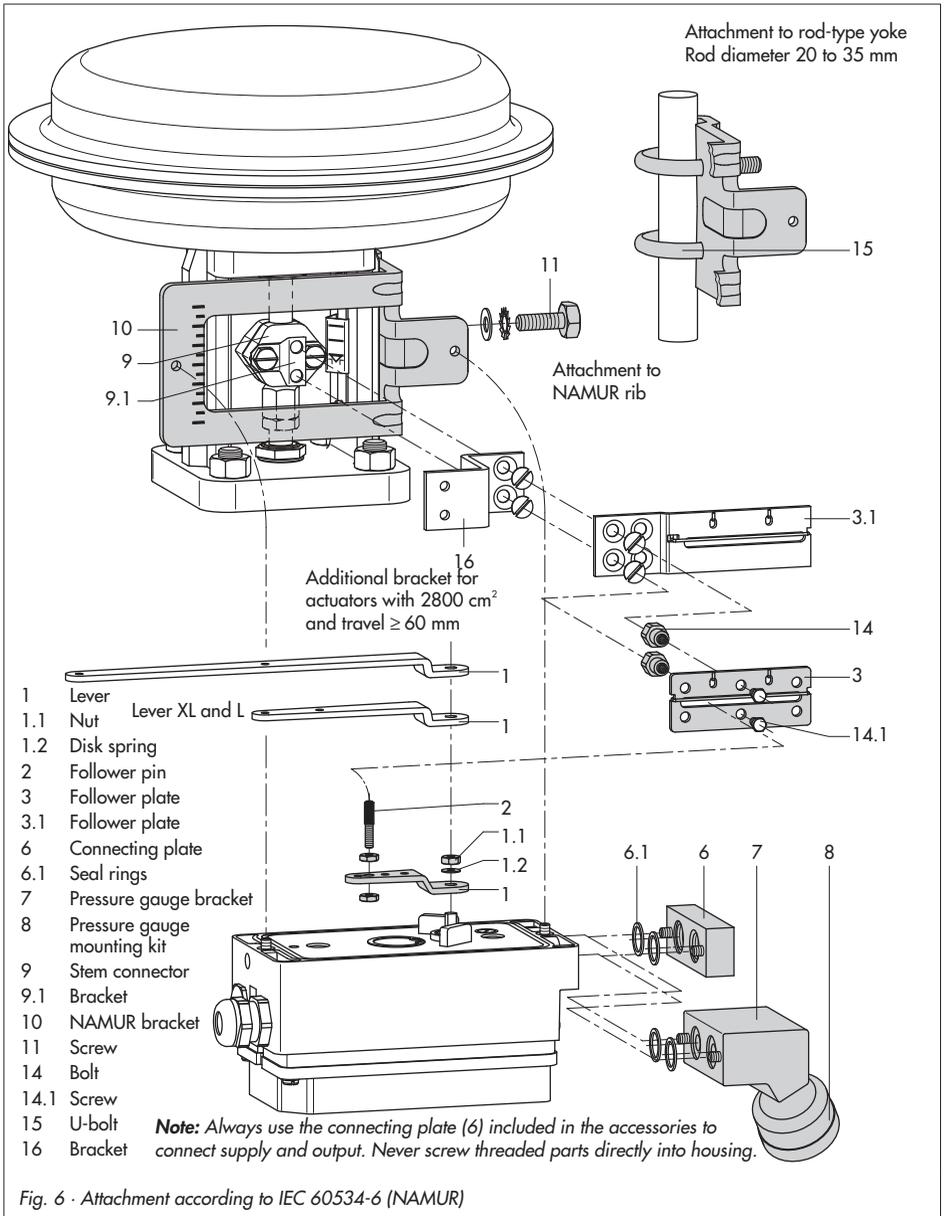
Attachment according to IEC 60534-6 (NAMUR)
